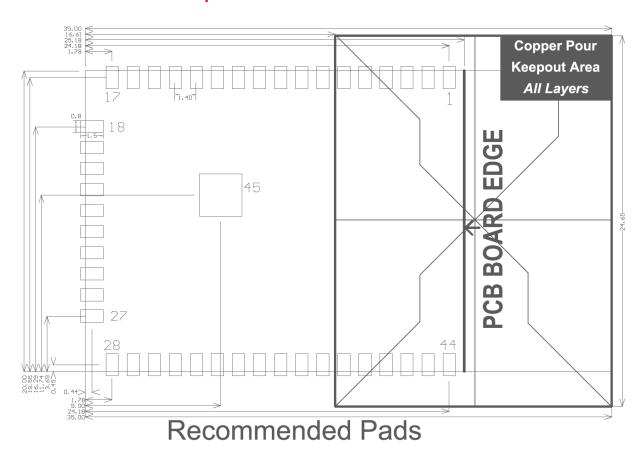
AES-BCM4343W-M1-G Module PCB Footprint
